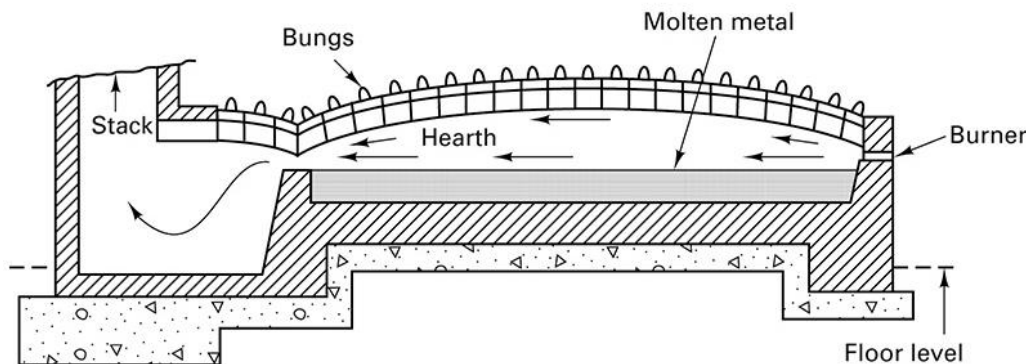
Cross section of a direct fuel-fired furnace. Hot combustion gases pass across the surface of a molten metal pool.
